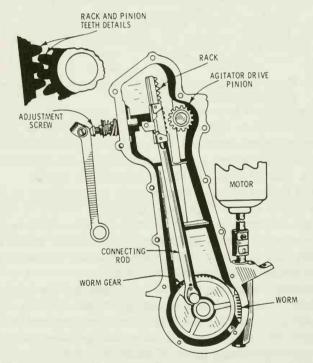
This gear-case mechanism employs a gear rack and a connecting rod to transfer motion from the motor shaft to the agitotor shaft.
